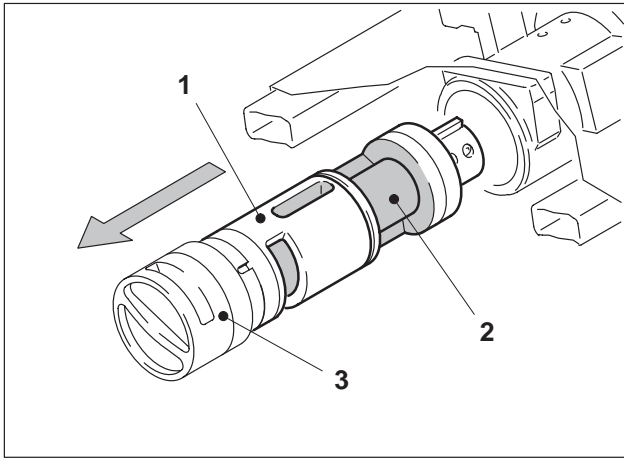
Rotary valve "suction tape vacuum regulation"; cleaning the valve ports
